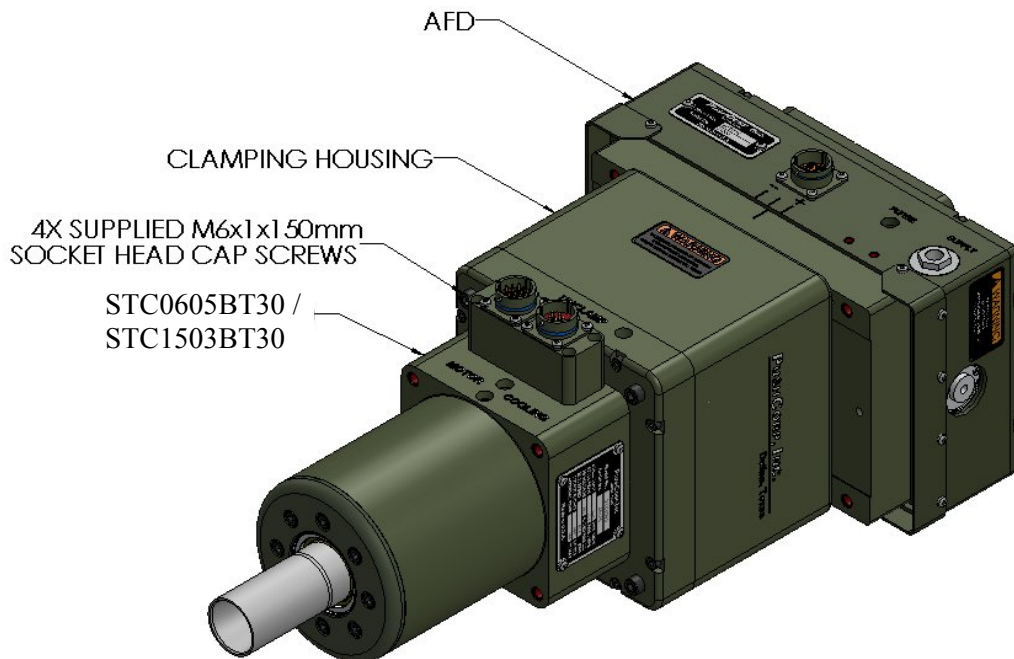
Spindle Motor Perpendicular-Axis Configuration
